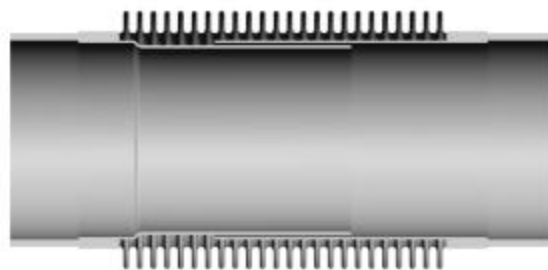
Typical hydroformed bellows design (cross section).
